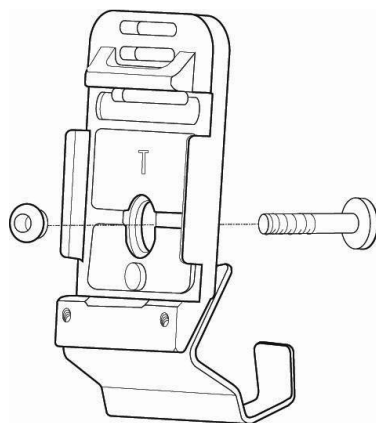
New ACH NVD Bracket Assembly with Slotted Flathead Screw and Locking Nut.
